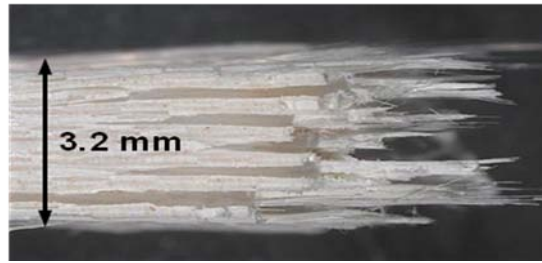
Fracture surface of the N720/AM specimen tested in tension to failure at 1000°C in laboratory air (side view).
